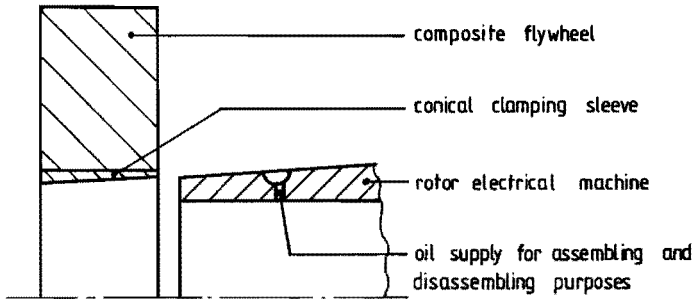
Composite flywheel with conical clamping sleeve for press fitted flywheel attachment.
